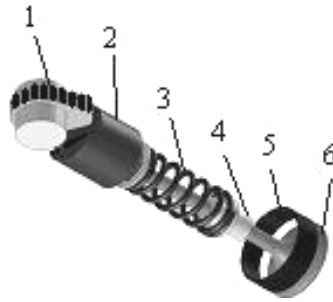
The scheme of the seat insert – valve – valve guide assembly, driven by camshaft; 1 – camshaft, 2 – valve lifter with permanent magnet, 3 – valve spring, 4 – valve guide, 5 – seat insert, 6 – valve
